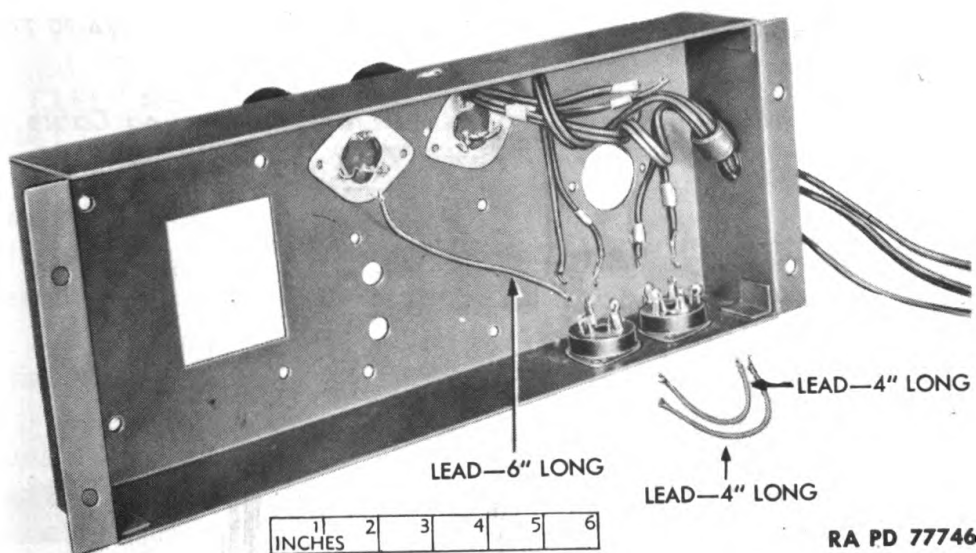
Removal of Connecting Leads From Power Supply Chassis
